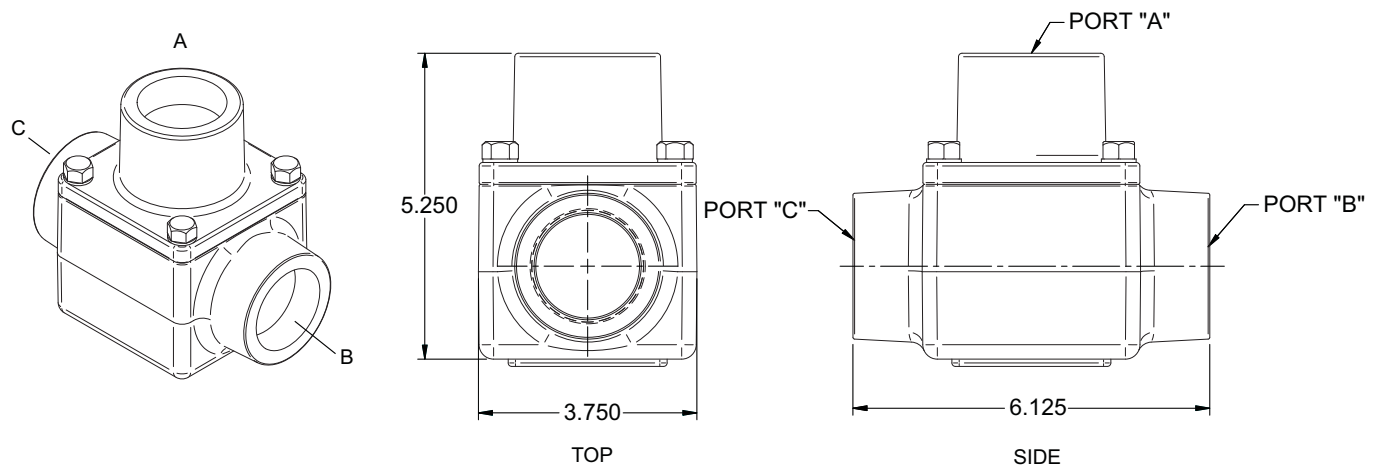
2" LTV Valve - Up to 750,000 Btu/hr
